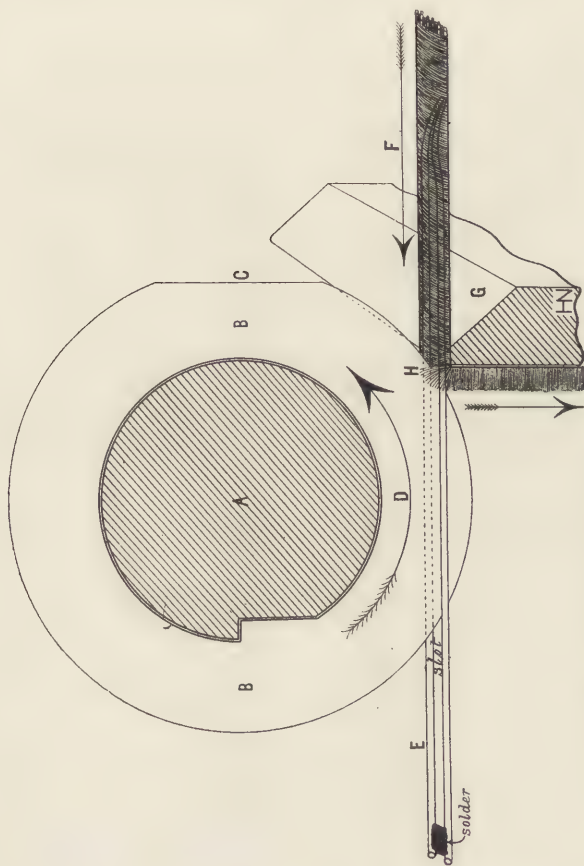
Part Section of a "Circular-knife," Fustian Cutting Machine.
